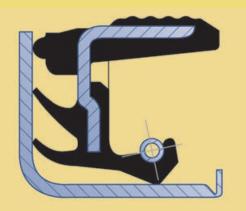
Unitized Seal w/ Dual Axial Dirt Lips & Thrust Bumper
